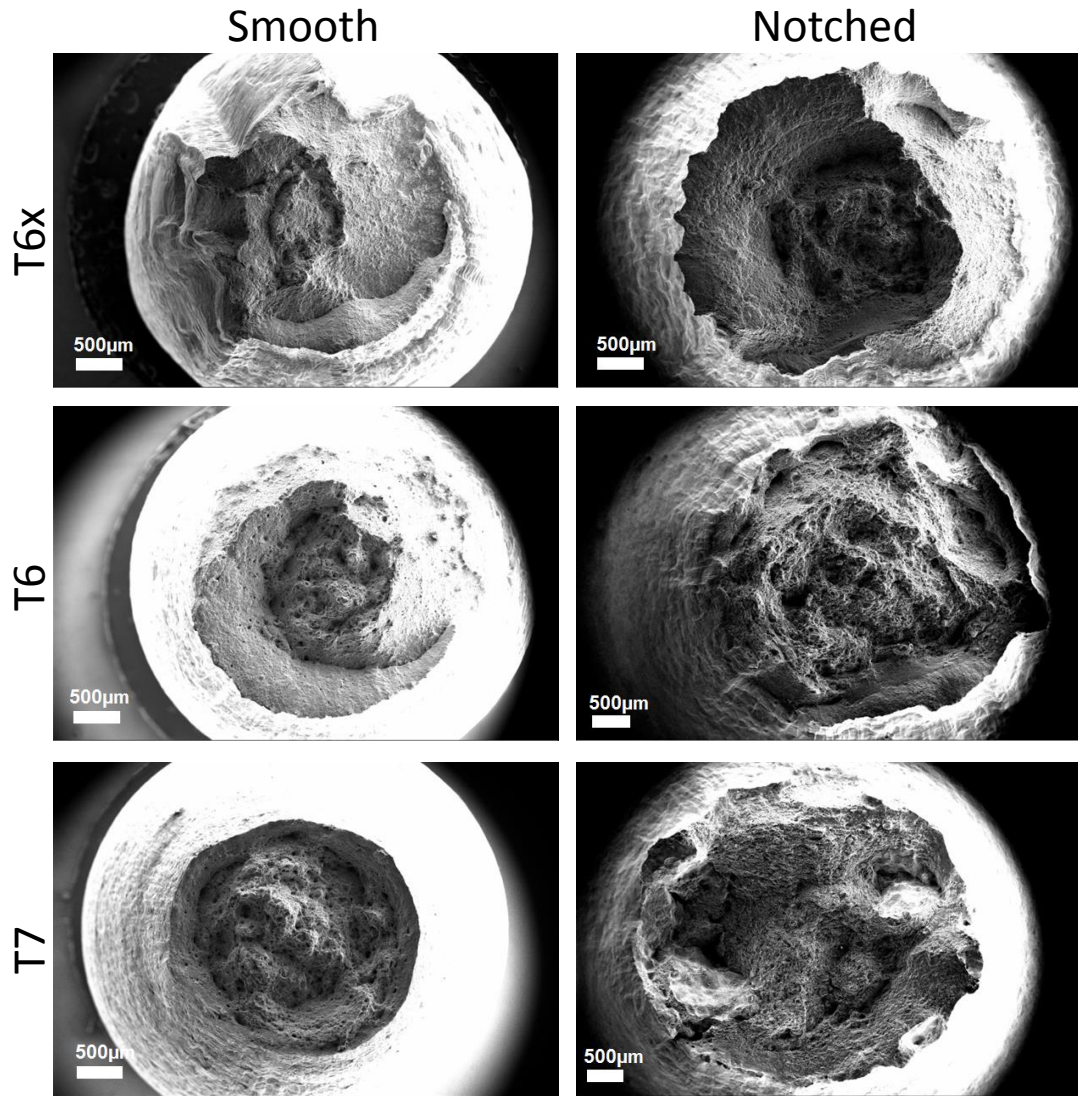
Global fracture surfaces of smooth and notched RR samples.
